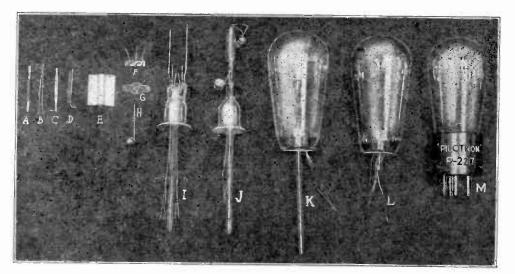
This photo will help you in following the assembly operations involved in the construction of the Pilotron P-227. The lettered parts are referred to in the accompanying text.
